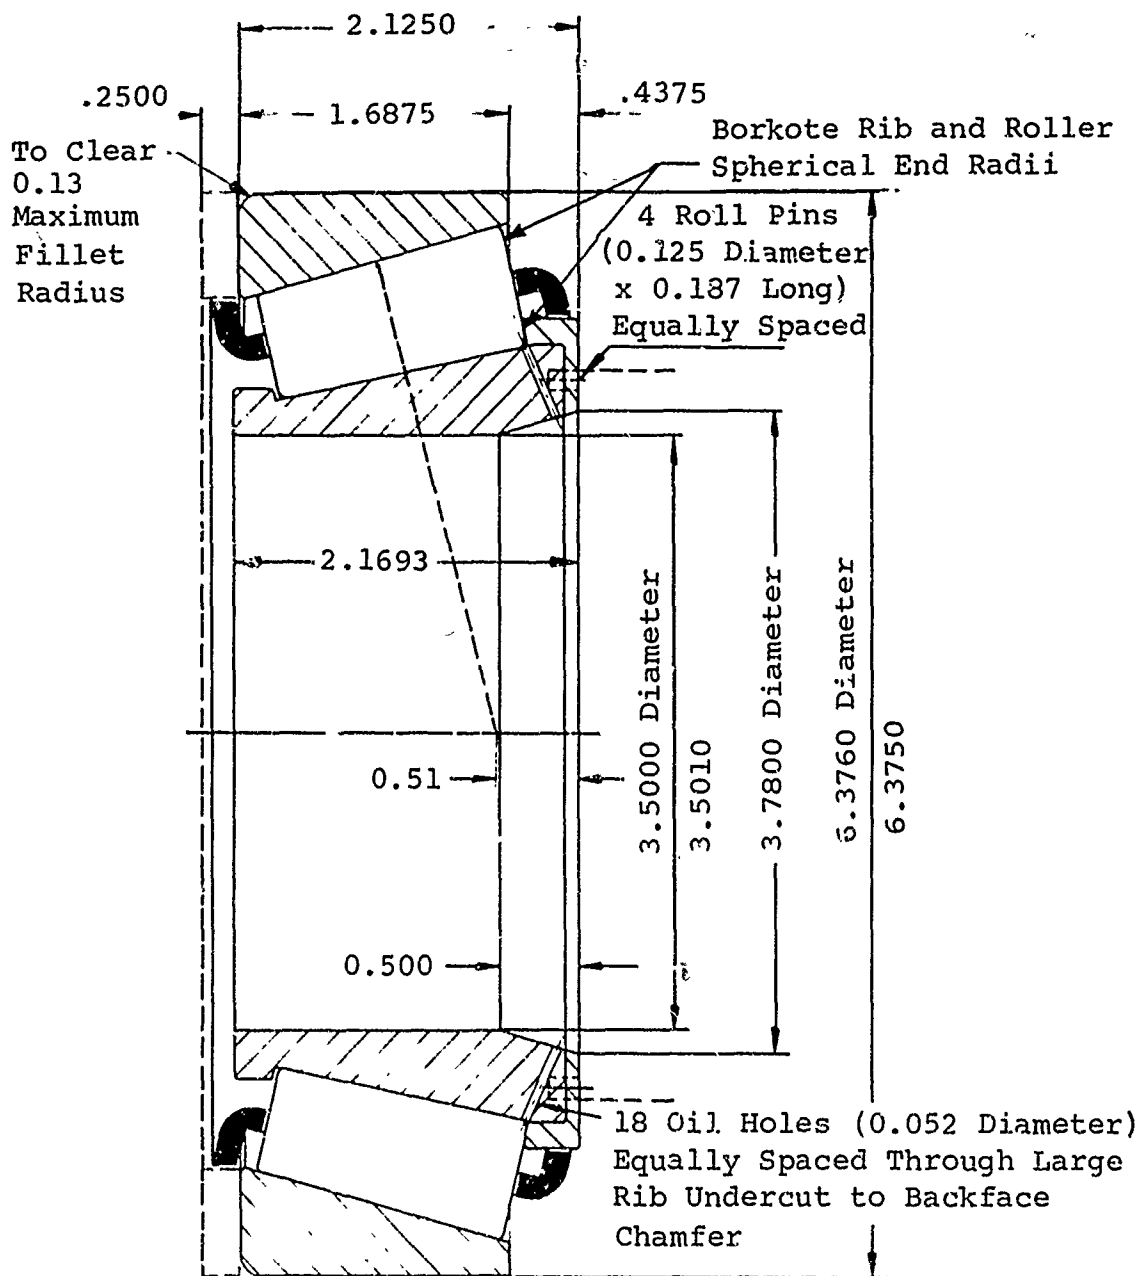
Fail-Safe Bearing Design With T-400 Rib.
